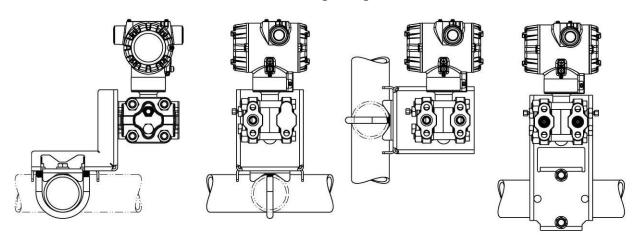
Typical mounting configurations of STD720, STD730 & STD770 for reference only
